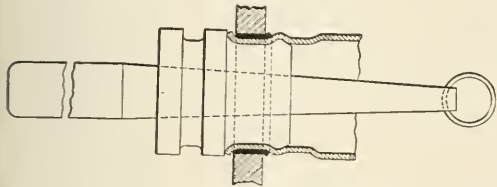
Lipped Sectional Expander Used to Expand the Firebox End of Tubes
